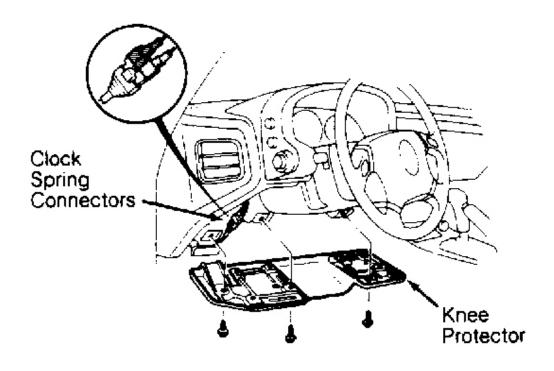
Locating Clockspring Connector Courtesy of MAZDA MOTORS CORP.
